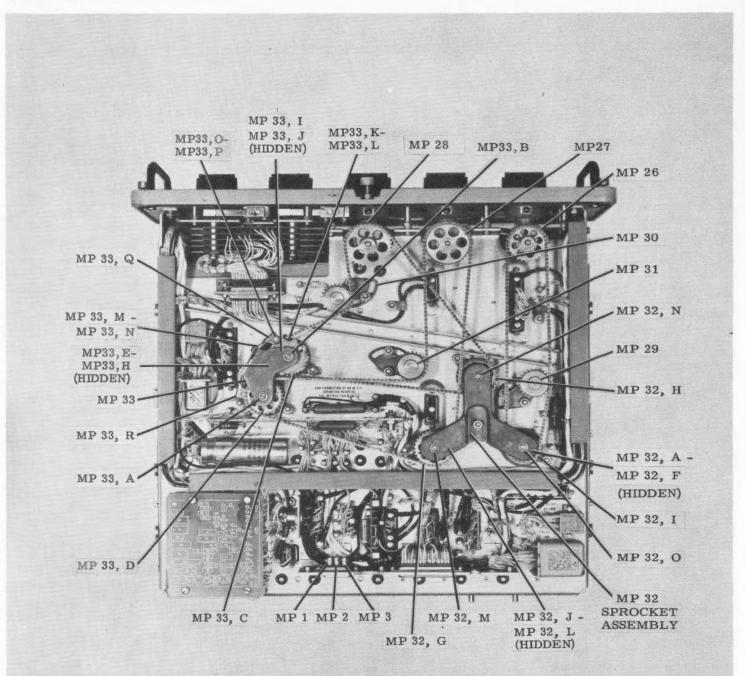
Radio Transmitter T-827/URT, Bottom View, Component and Test Point Location (Sheet 1 of 2)
